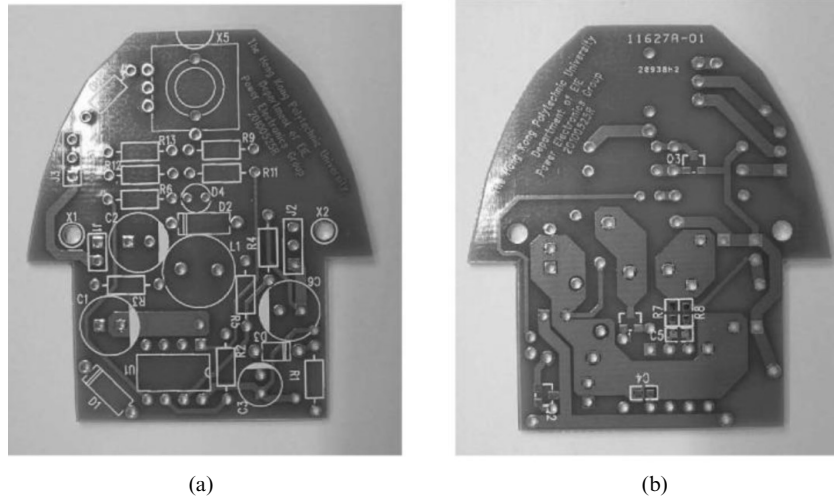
(a) Top view of PCB. (b) Bottom view of PCB.
